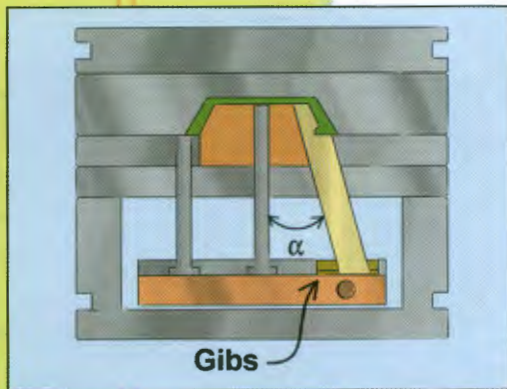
Illustration B: A lifter shown with the mold closed. Lifter angle is exaggerated, should not exceed 5°.
